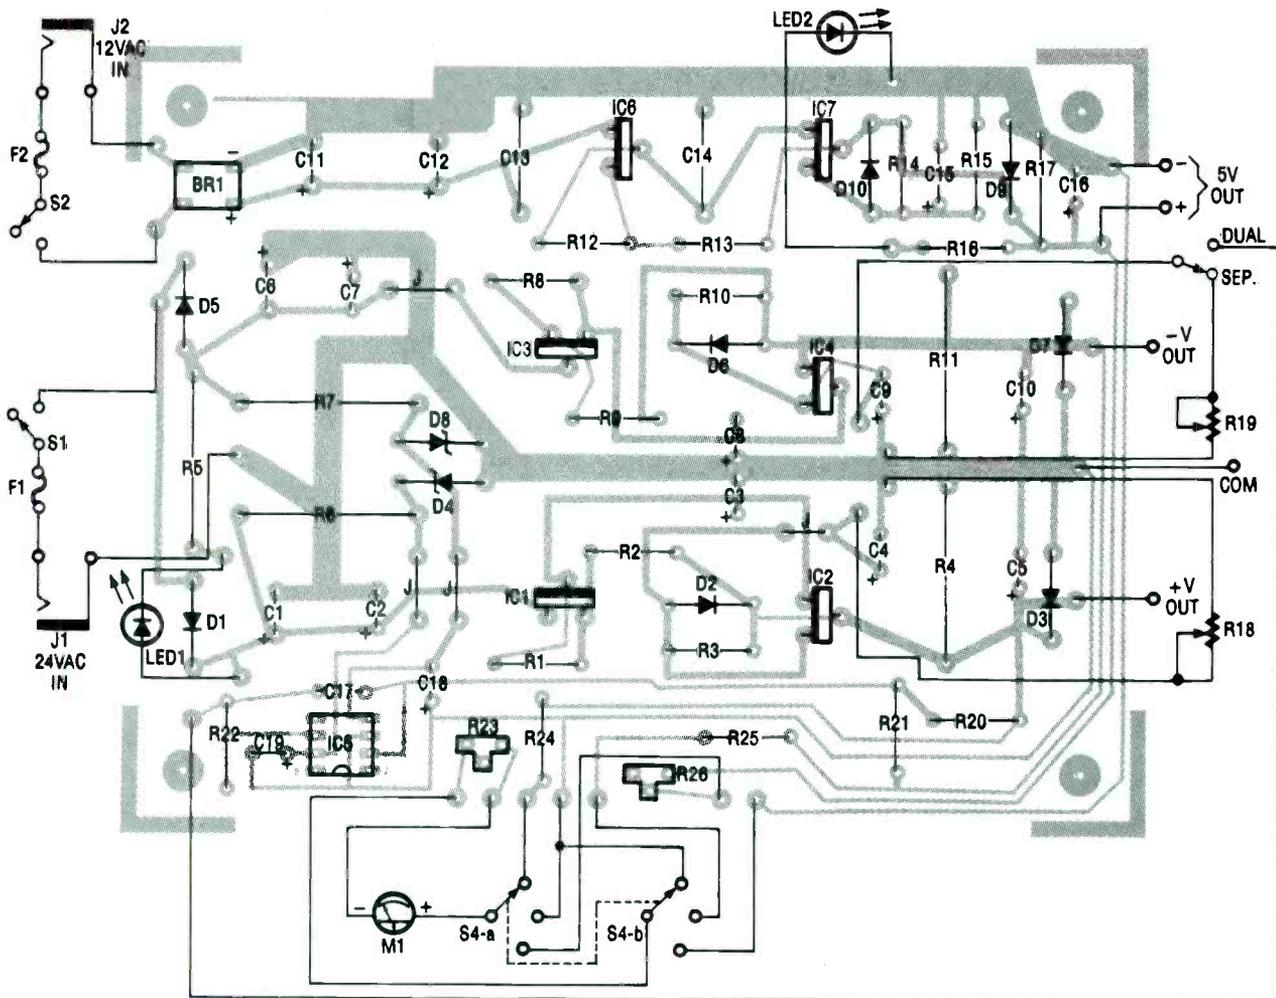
PARTS PLACEMENT DIAGRAM. Be sure to heatsink the voltage regulators.
